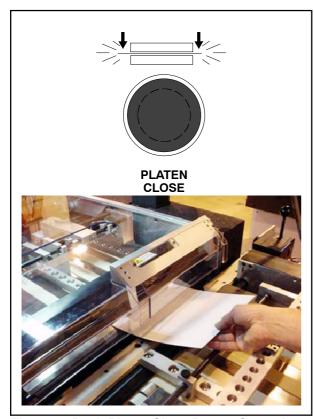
Push Platen Close Button Several Times Until Paper Comes Out Clean
